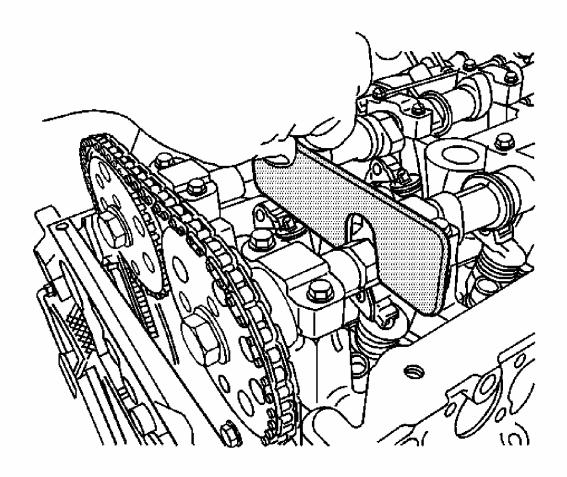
Using Camshaft Holding Tool Courtesy of GENERAL MOTORS CORP.
